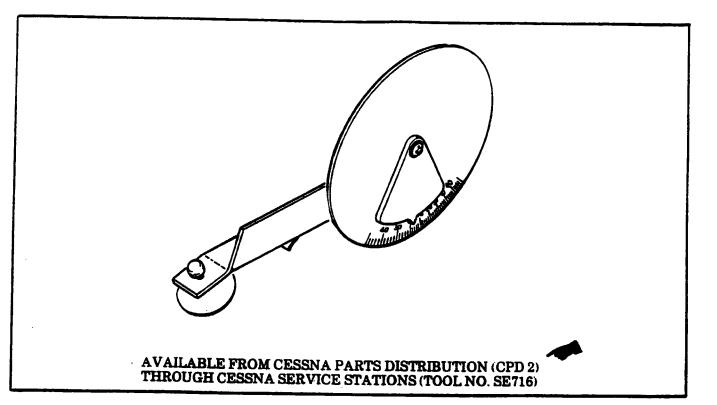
Inclinometer for Measuring Control Surface Travel
